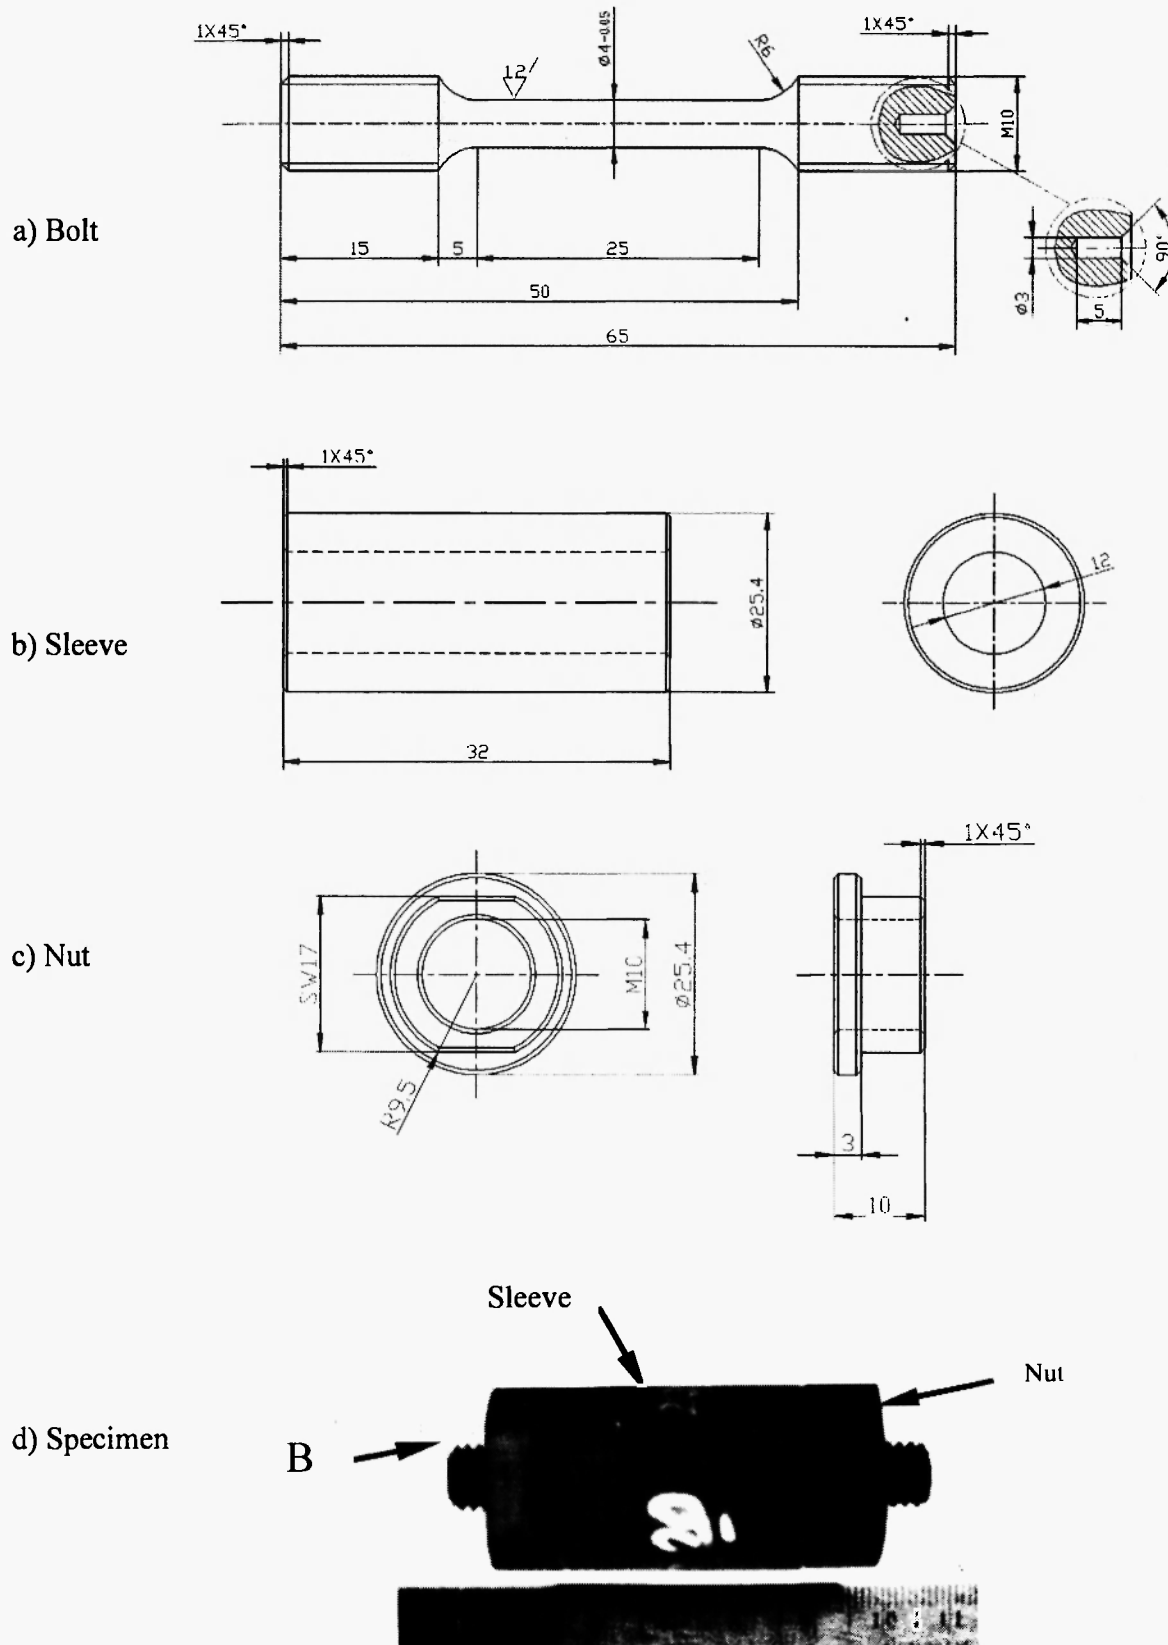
Drawing detail of bolt, sleeve, nut and example of specimen
